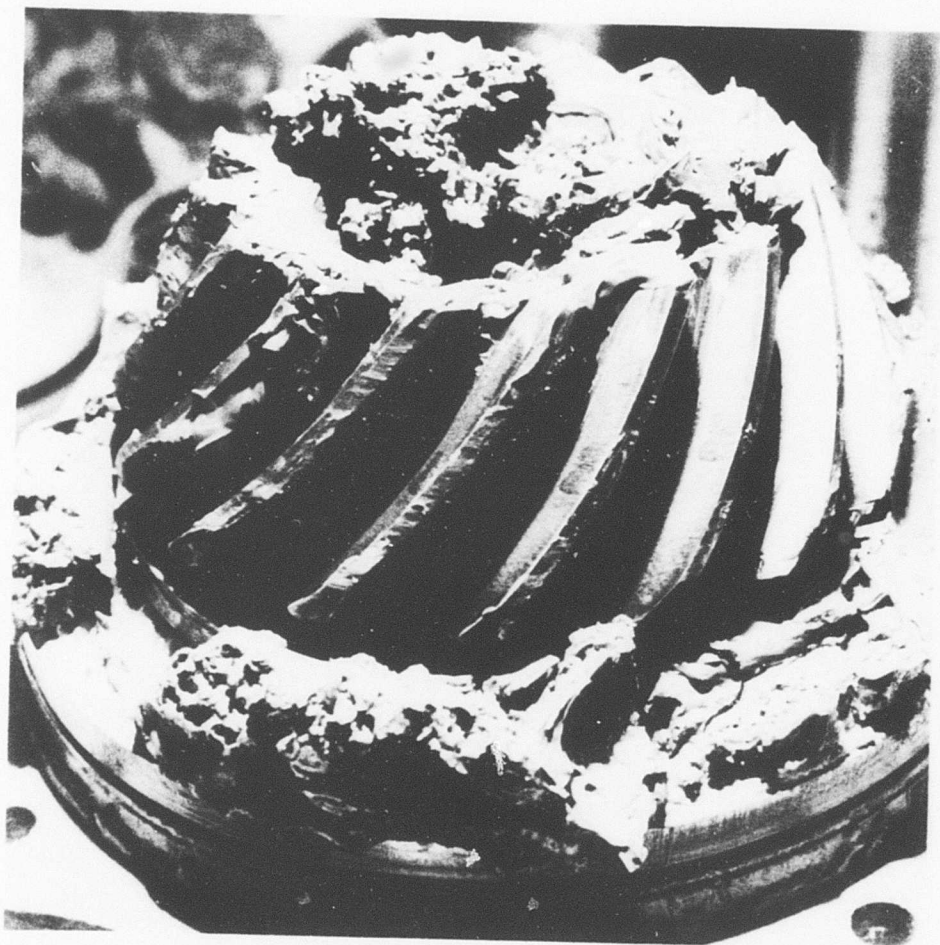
Tail Gearbox Input Gear After 4 Hours
